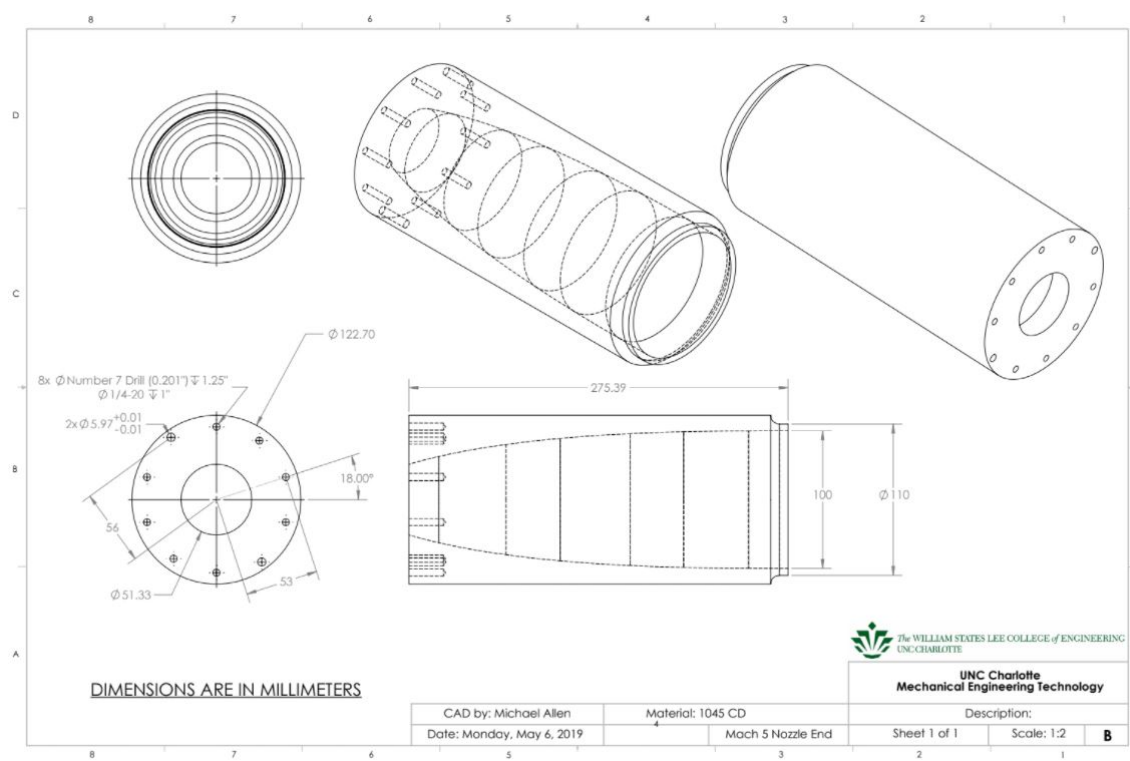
Drawing of the UNCC HSWT Mach 5 nozzle inlet.
